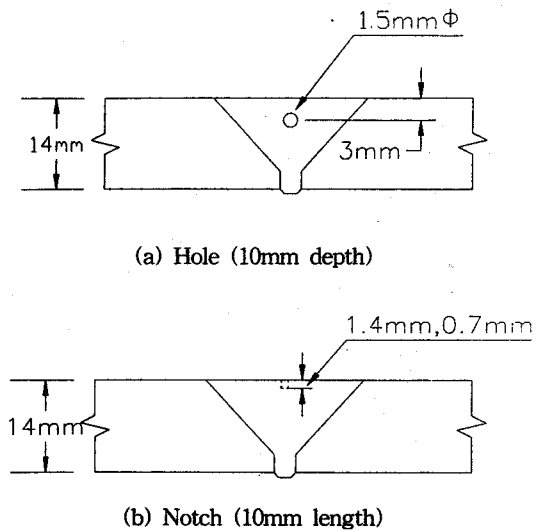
Geometries of artificial welding defect specimens (28mm width).
